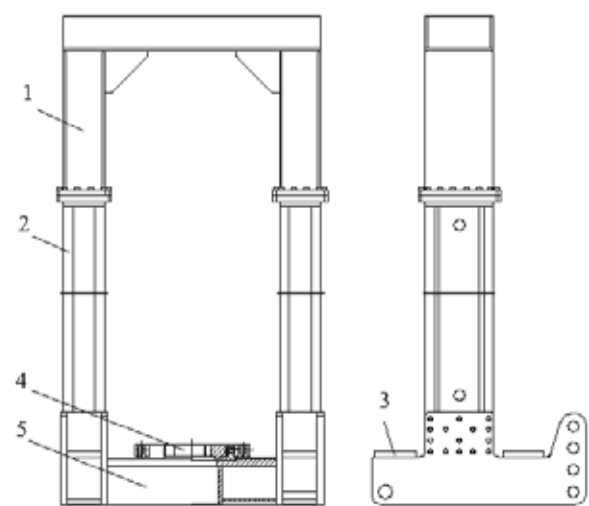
Structure of drilling frame of the raise boring machine ZFY5.0/600. 1 – beam; 2 – guiding square columns; 3 – connecting flange of the propulsion cylinder; 4 – flashboard assembly; 5 – base.
